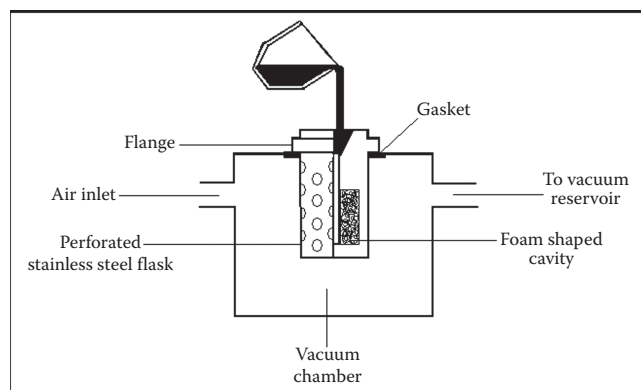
Schematic section of vacuum-assisted solid mold foam metal casting with burnable pattern
